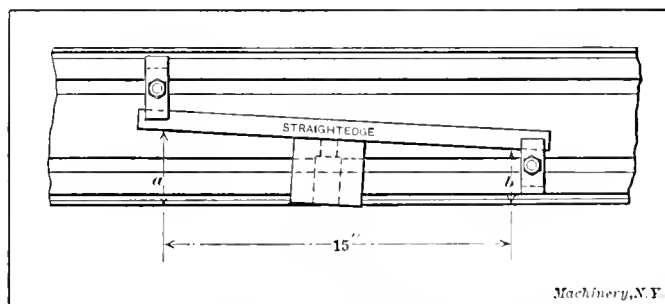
Method of Accurately Setting Straightedge to a Given Angle by using Test Indicator and Graduated Feed-Screw Dials
